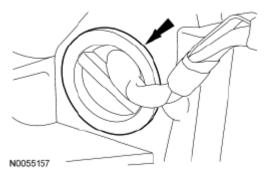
Locating Wiring Harness Grommet Courtesy of FORD MOTOR CO.
